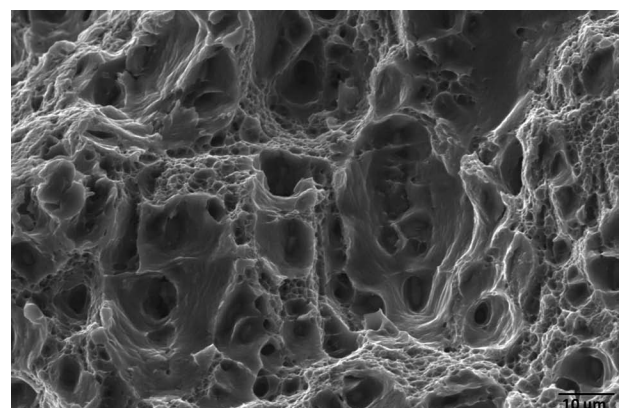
High magnified image of the fracture surface shown in Fig. 193
